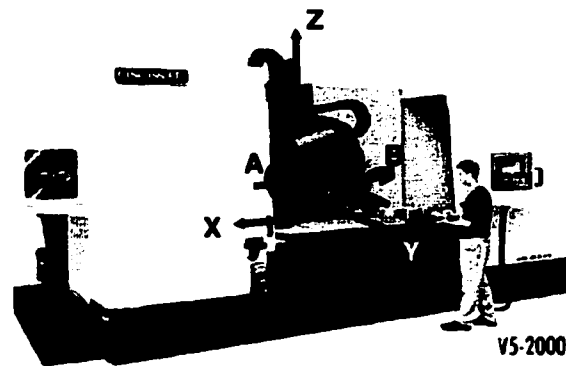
Diagram of a 5-Axis CNC Milling Machine
